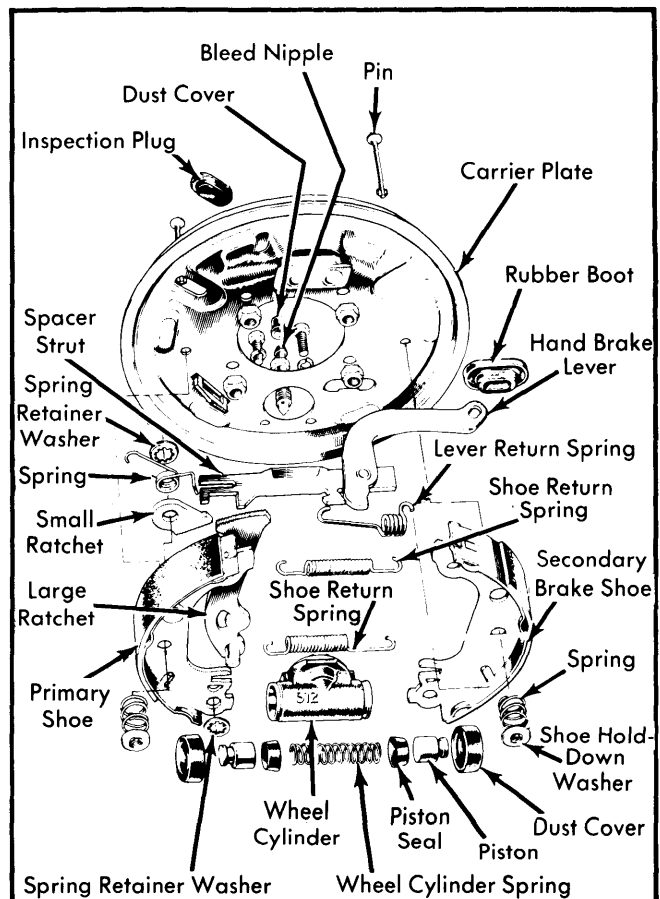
Exploded View of Fiesta Rear Brake Assembly
